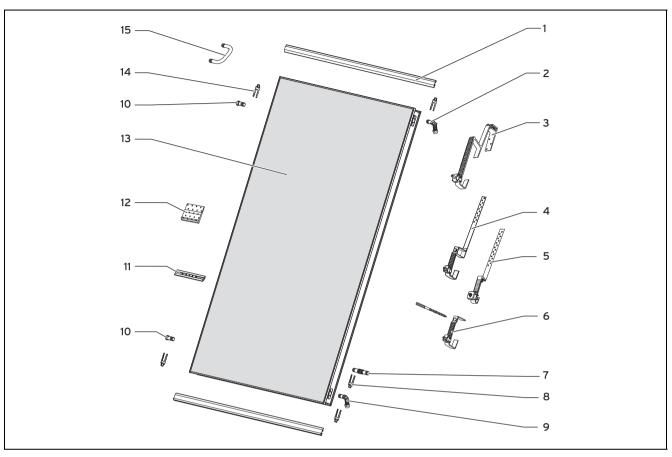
Installation set for vertical and horizontal on-roof installation (here: vertical collector)
